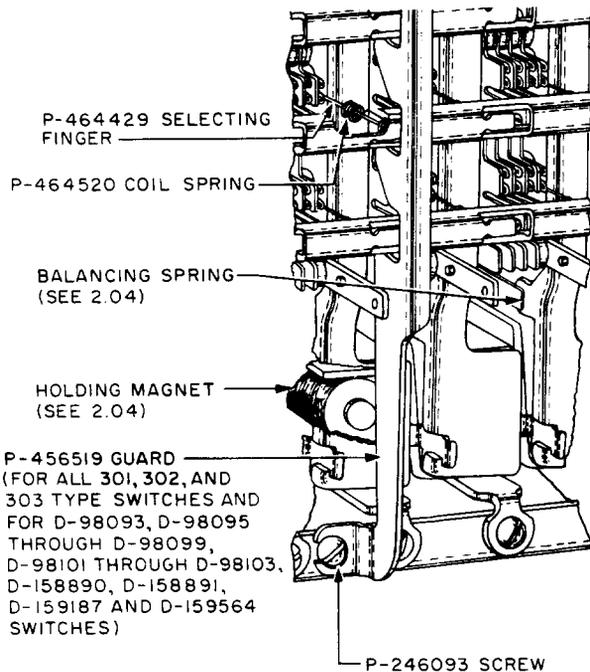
Partial Rear View of Switch Showing Magnet Mounting Parts and Terminal Spacers
